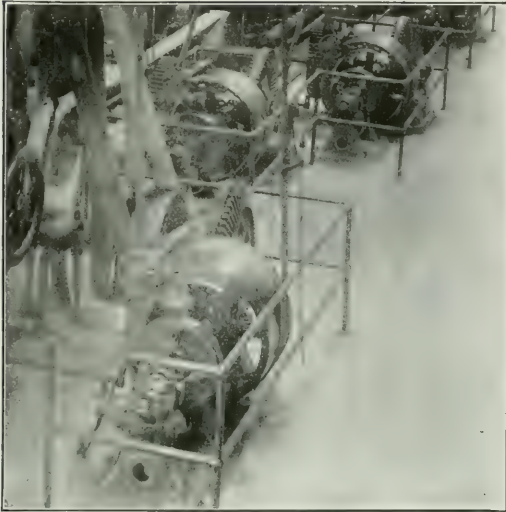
Floor Drives at Back of Machine Enclosed by Pipe Railings.
